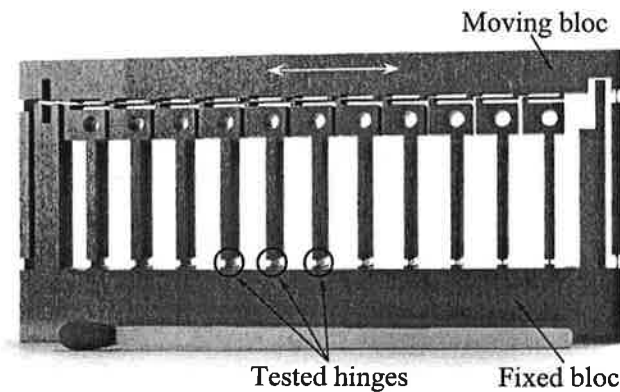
Fatigue test-specimen (the match stick is 50mm long)
